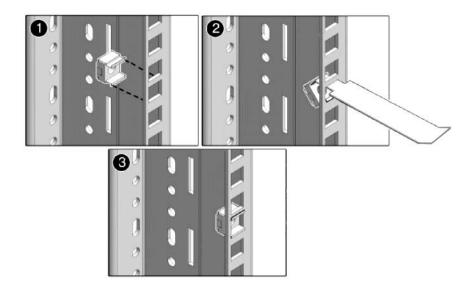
Inserting Cage Nuts in Square Holes Using the Insertion Tool
